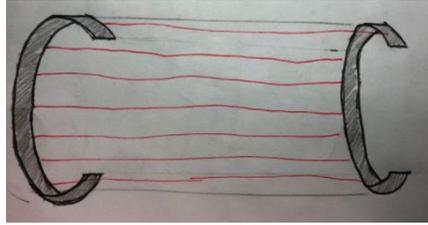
Hot Wire Foam Cutter Heat Exchanger Iso View
